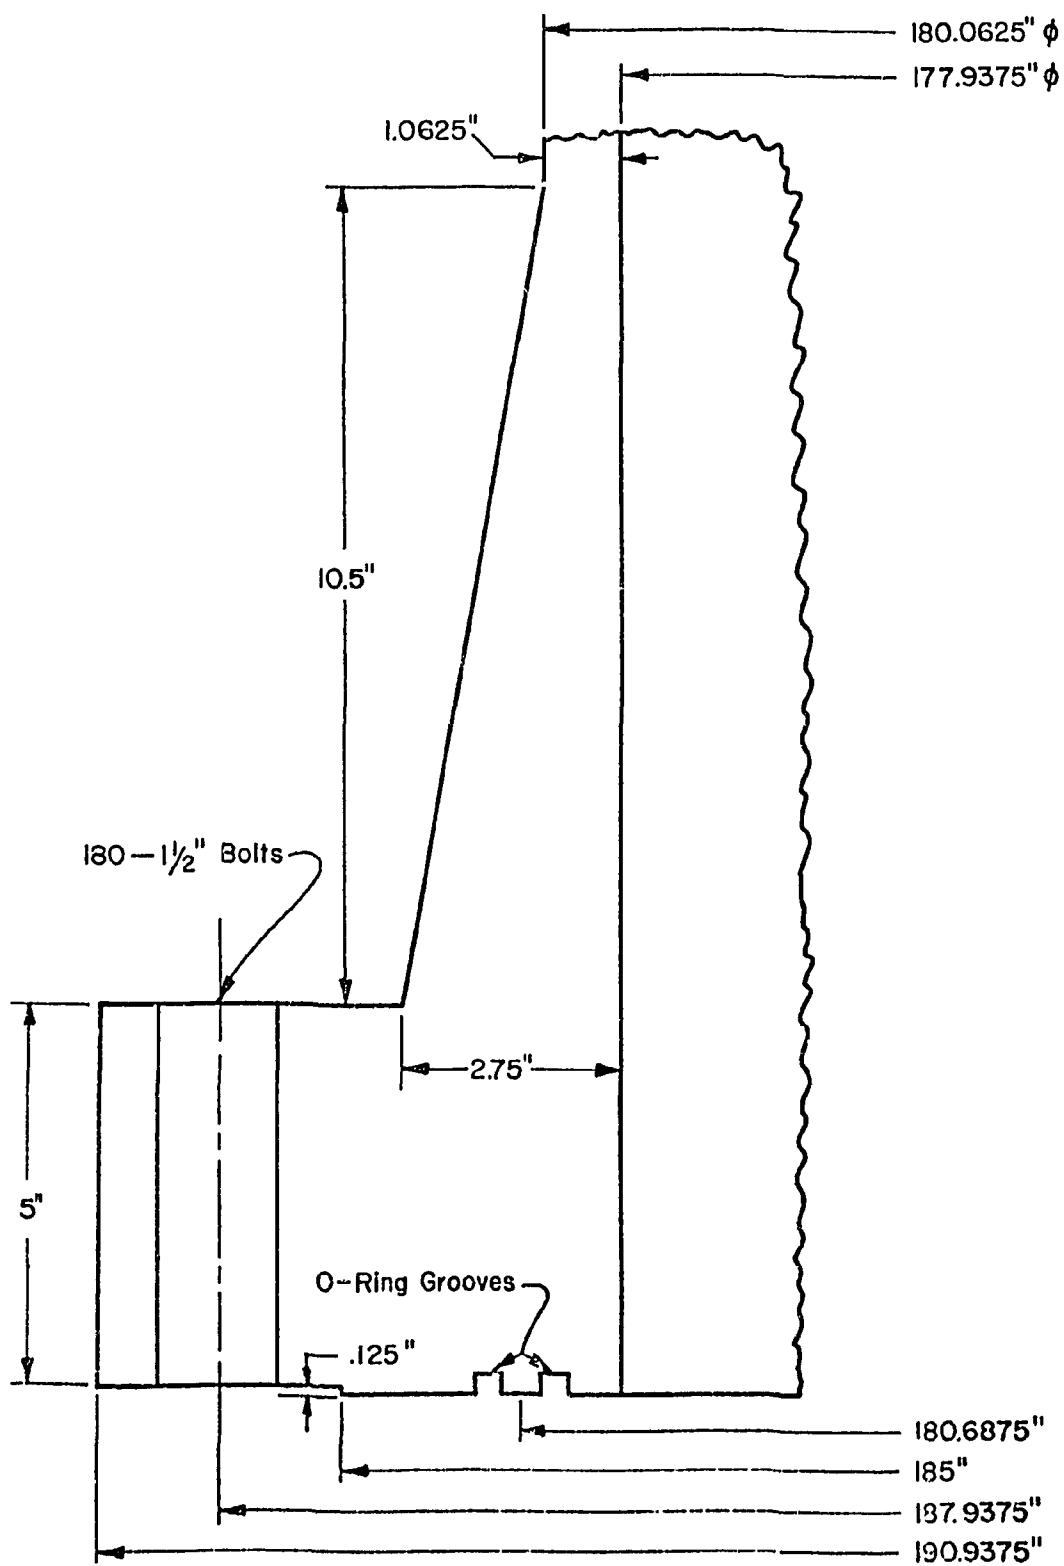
DIMENSIONS OF REFERENCE (8) FLANGES,
